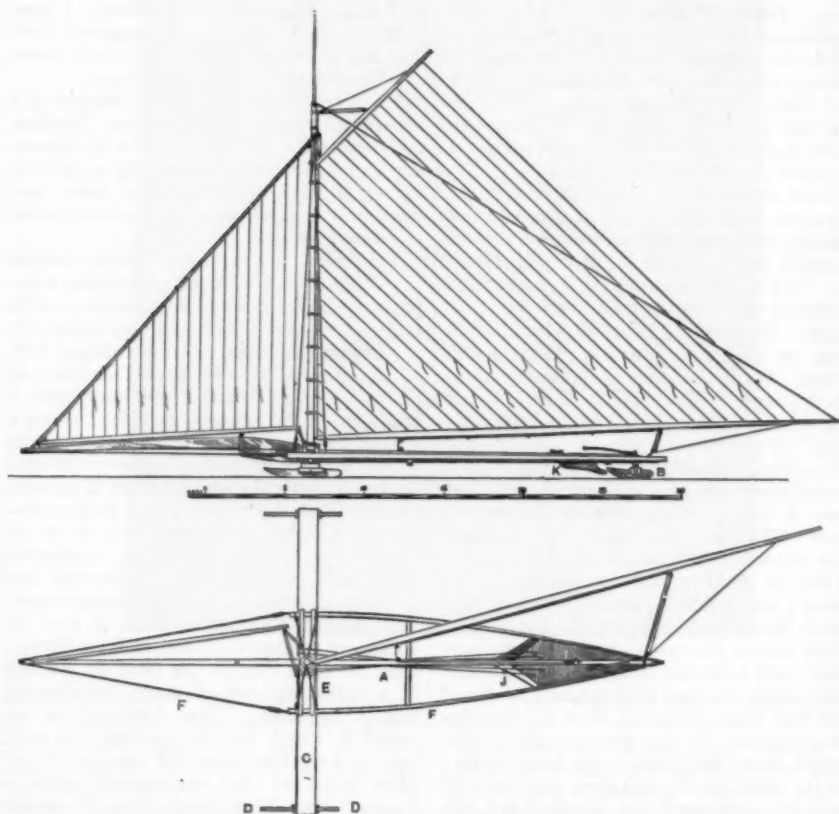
PLAN AND ELEVATION OF AN ICE-YACHT.
